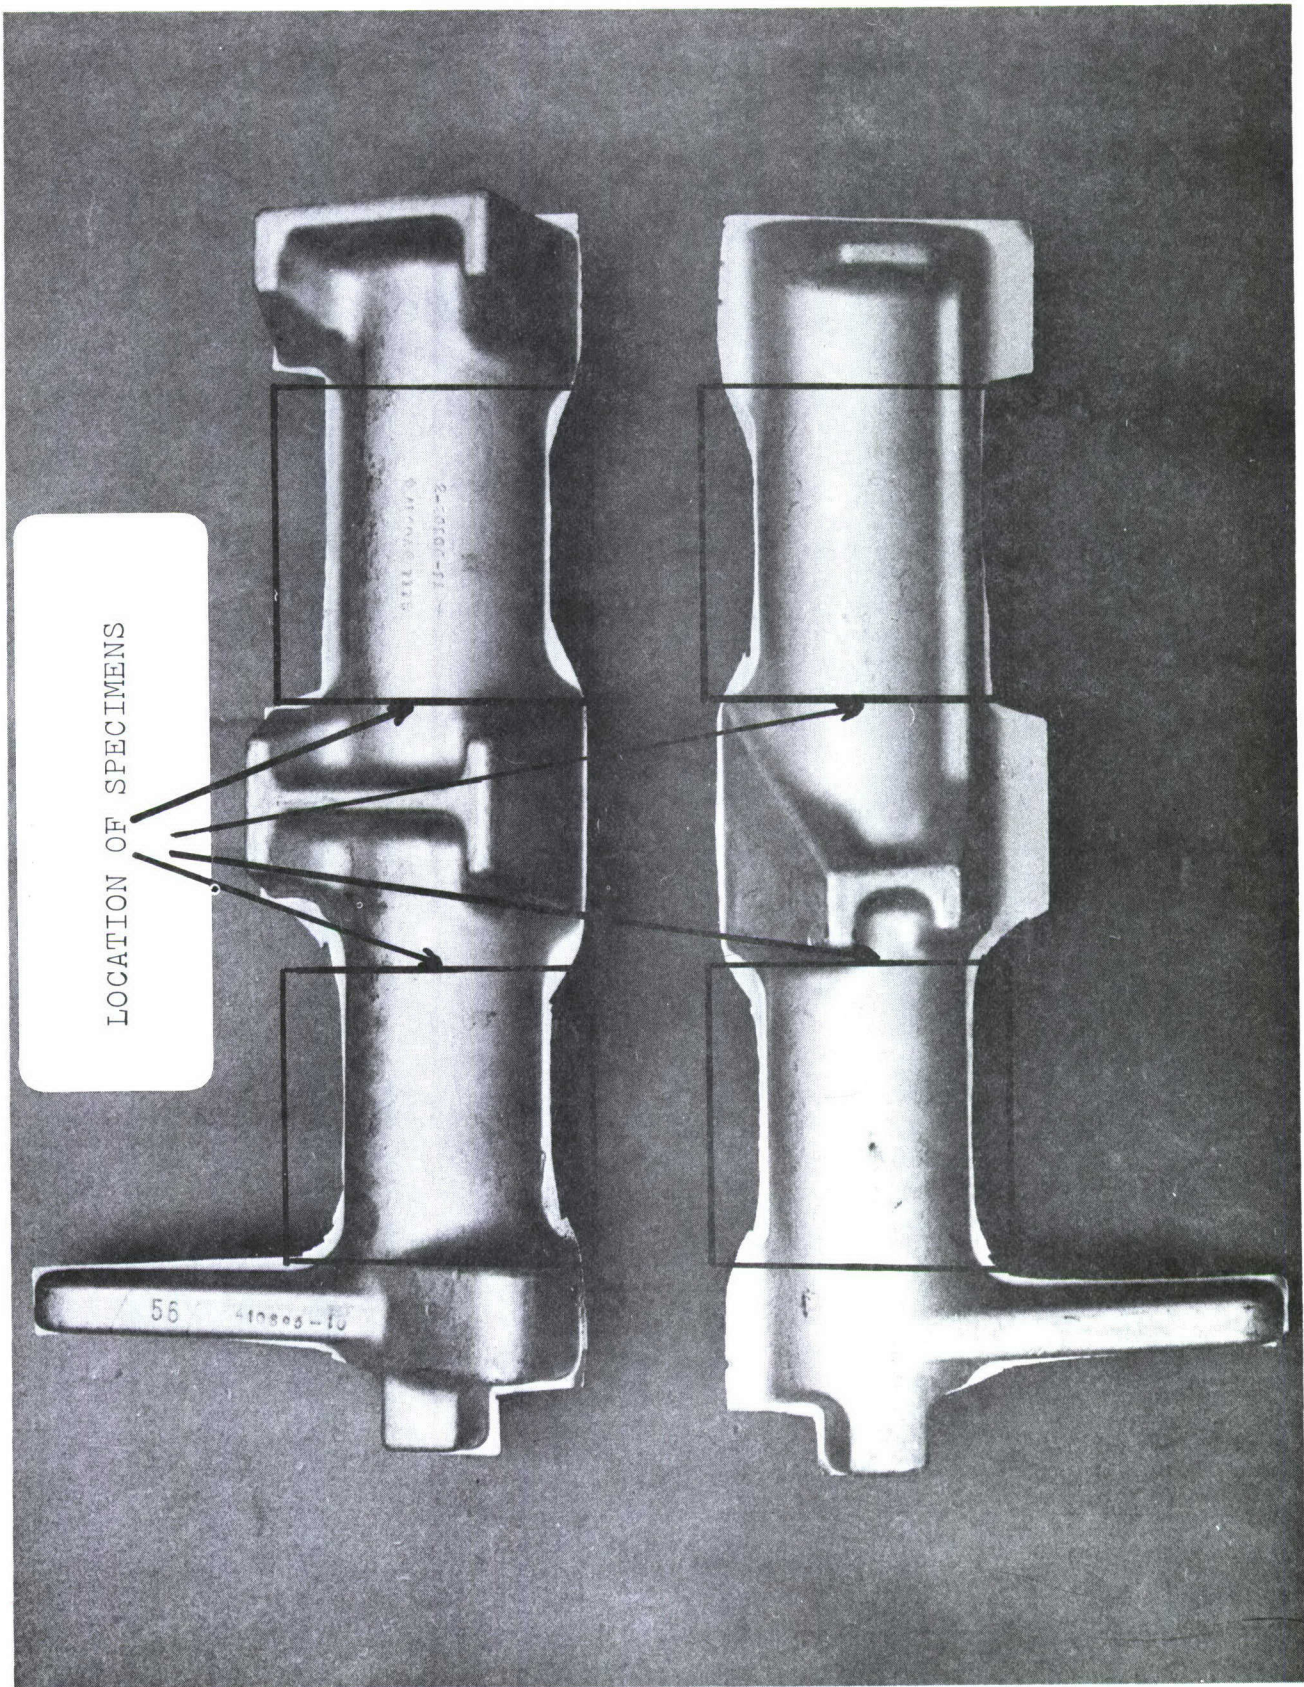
7049-T73 AND 7175-T736 DIE FORGING
